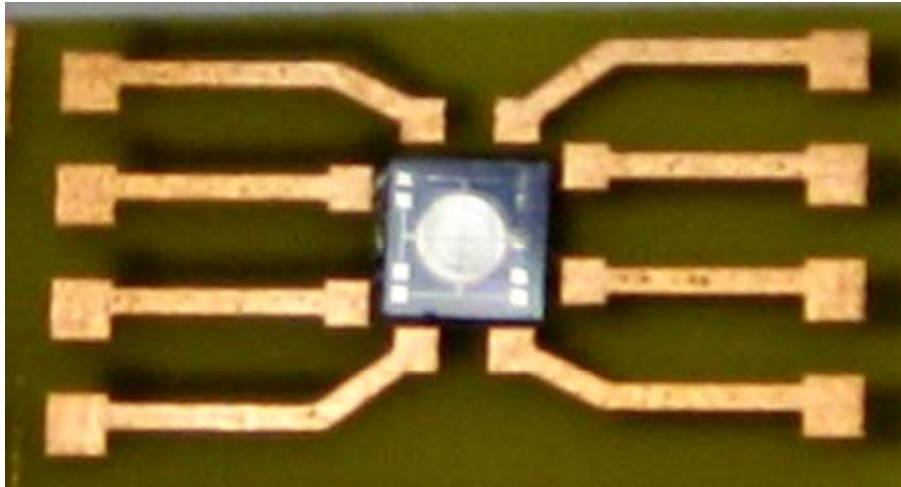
Device chip is epoxy glued in the center of the diced PCB board.
